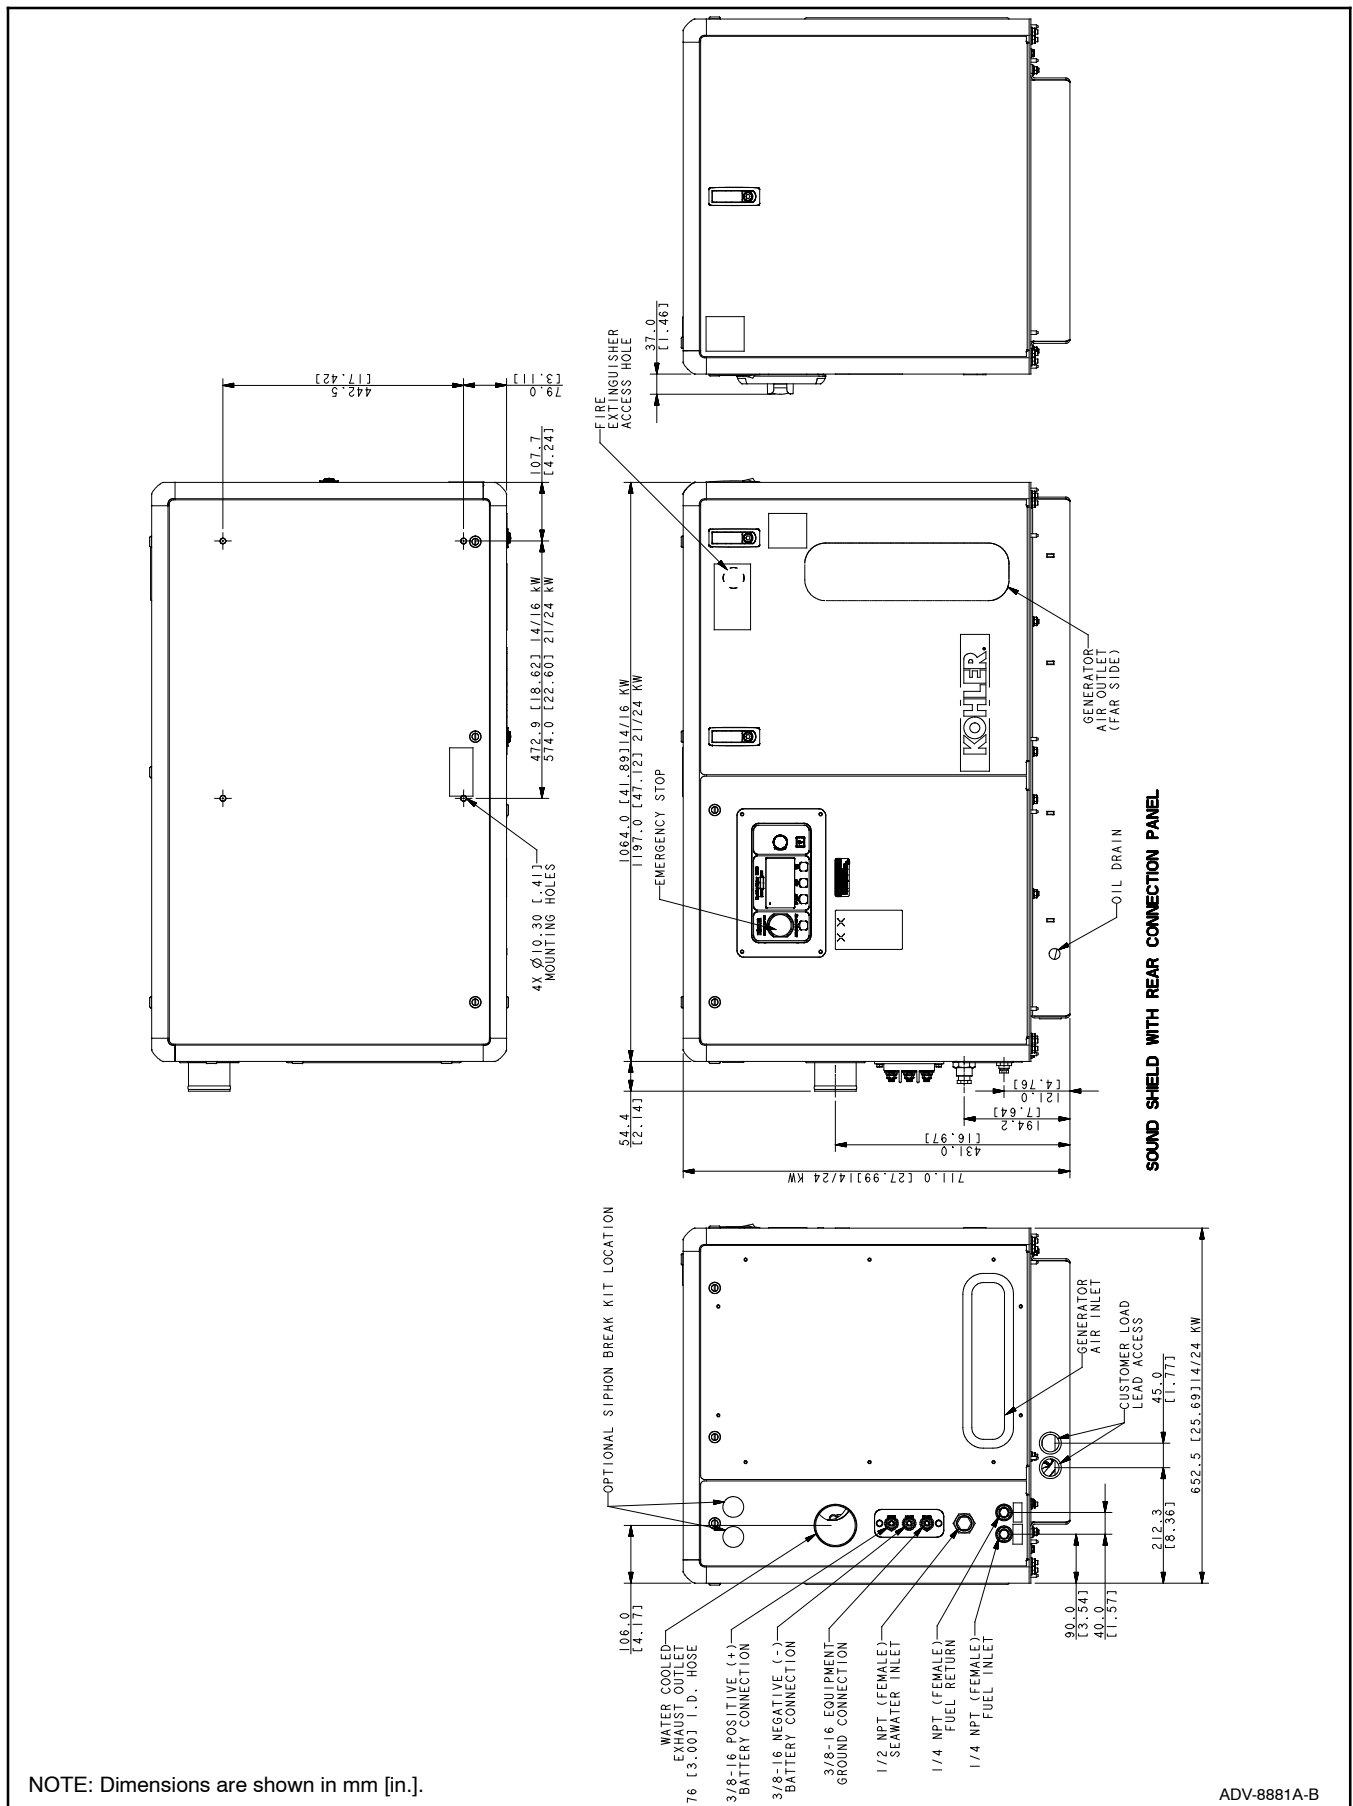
Dimension Drawing—Sound Shield, 14- 24EKOZD and 12- 20.5EFKOZD (Sheet 1 of 4)
